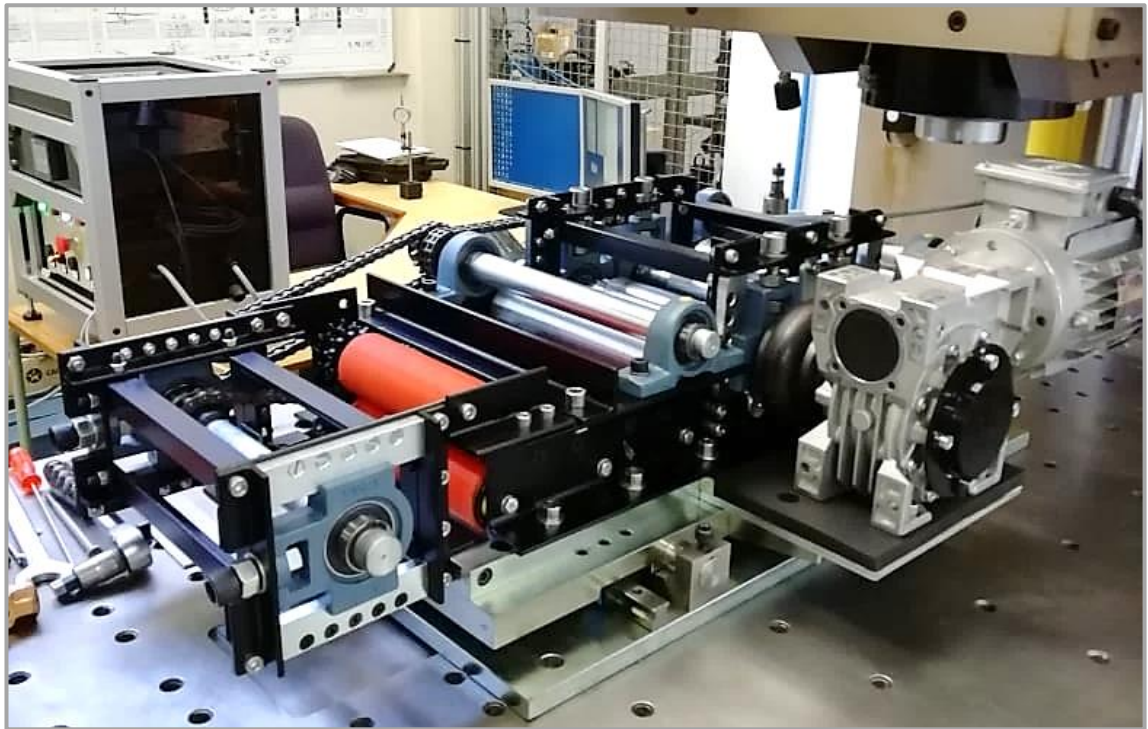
Bobbin FSW Feeder and Tool integration with the eNtsa MTS platform
